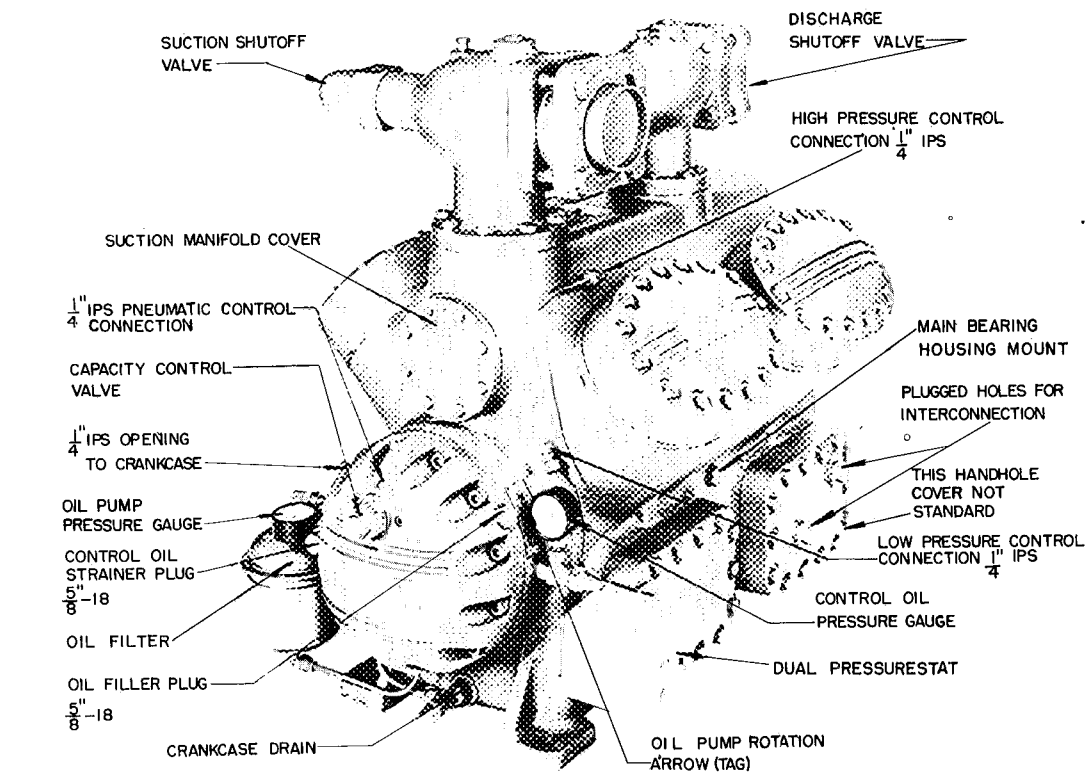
5H80 COMPRESSOR (SIDE AND PUMP END VIEW)
